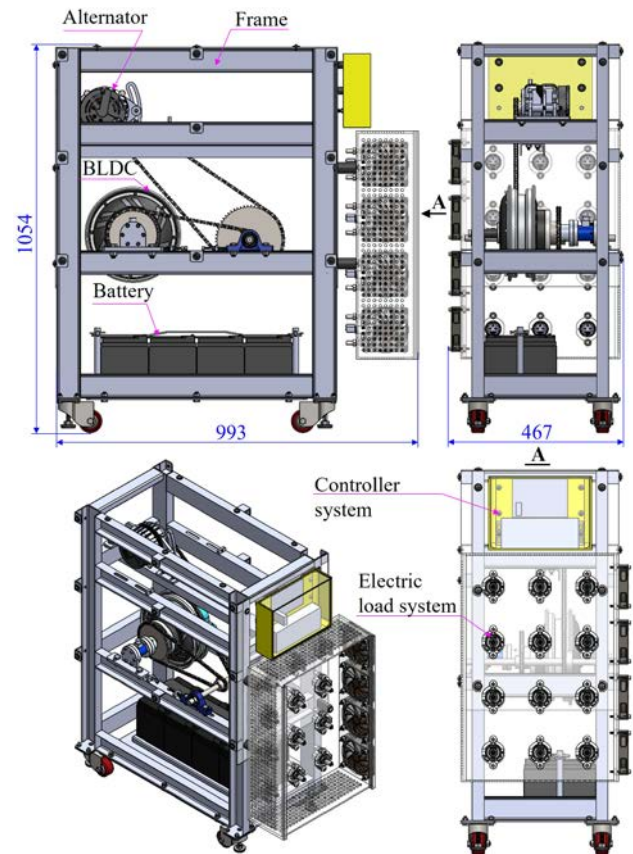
The 3D general layout drawing of the dynamometer with a 2-stage drive.
